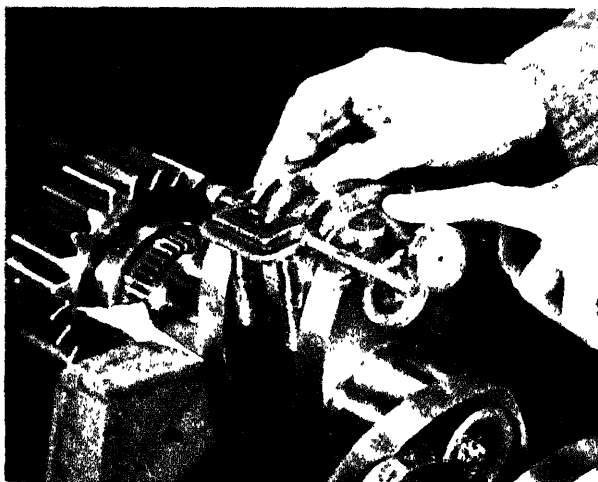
ASSEMBLE BOTH CONNECTING RODS AND CHECK FOR CLEARANCE AND END FLOAT
